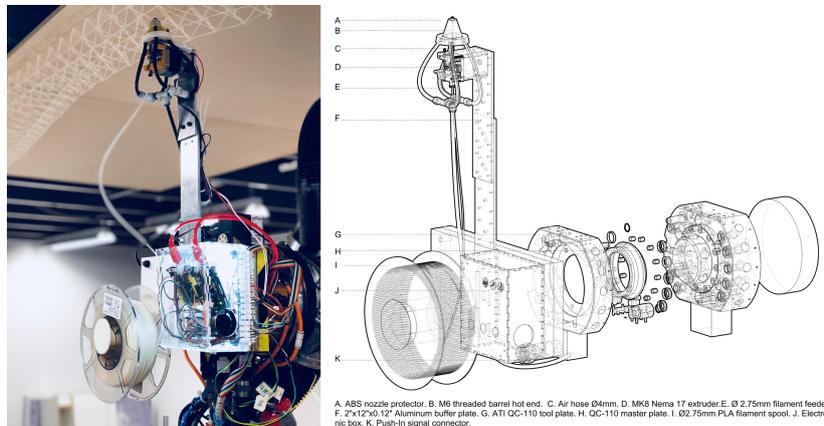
FOAM tool components: (Left) The working tool mounted on the robot arm. (Right) An annotated view of the components .
